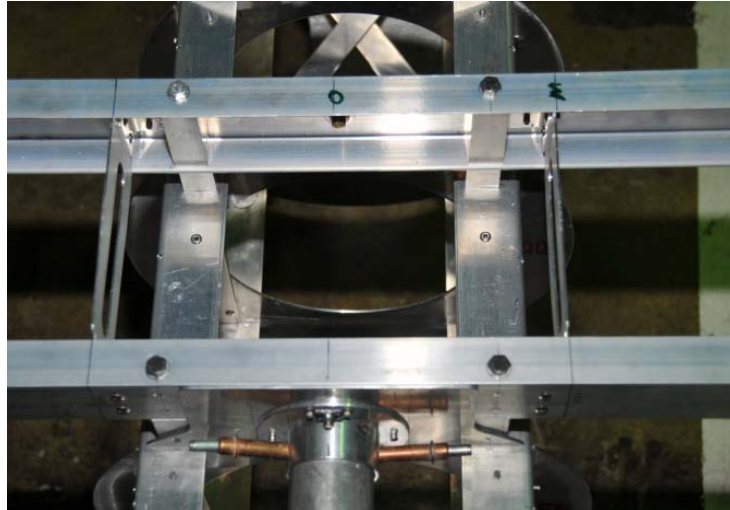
Assembly of Wing to Fuselage Connection
